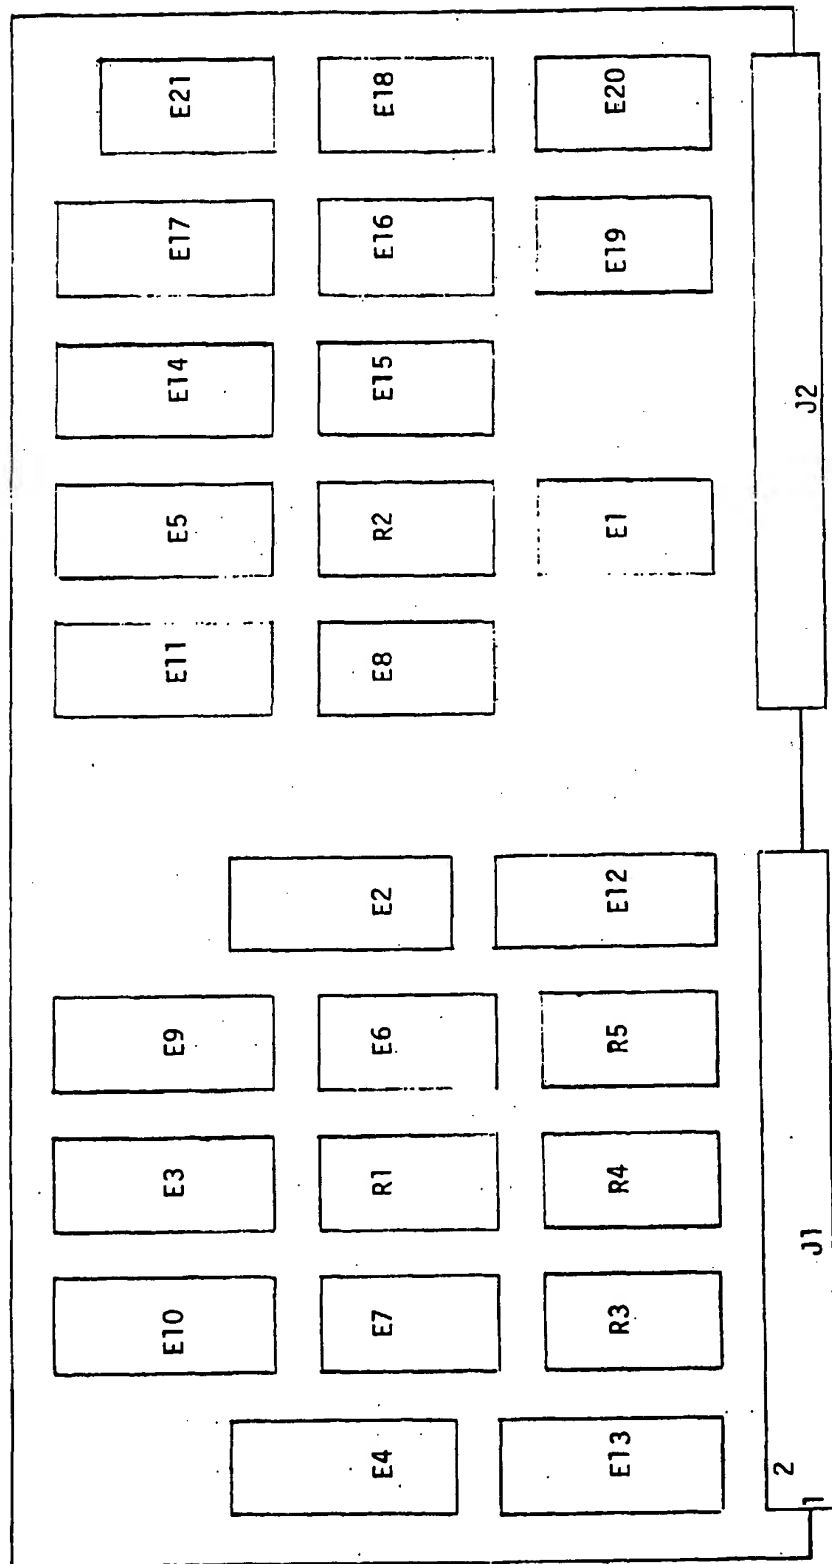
TERMINATION AND DRIVER BOARD LAYOUT
